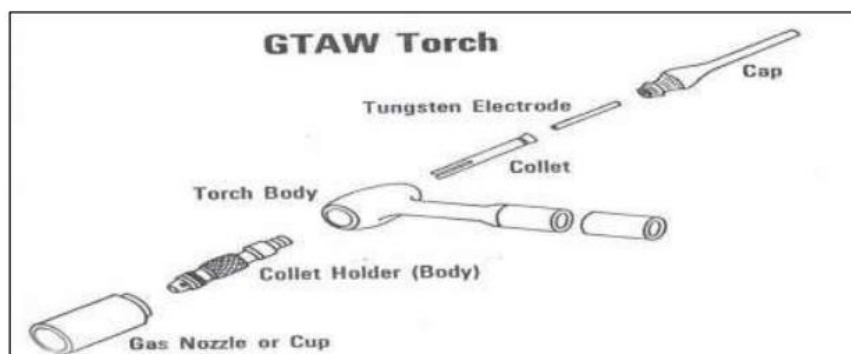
parts associated with welding torch (nptl.ac.in)
